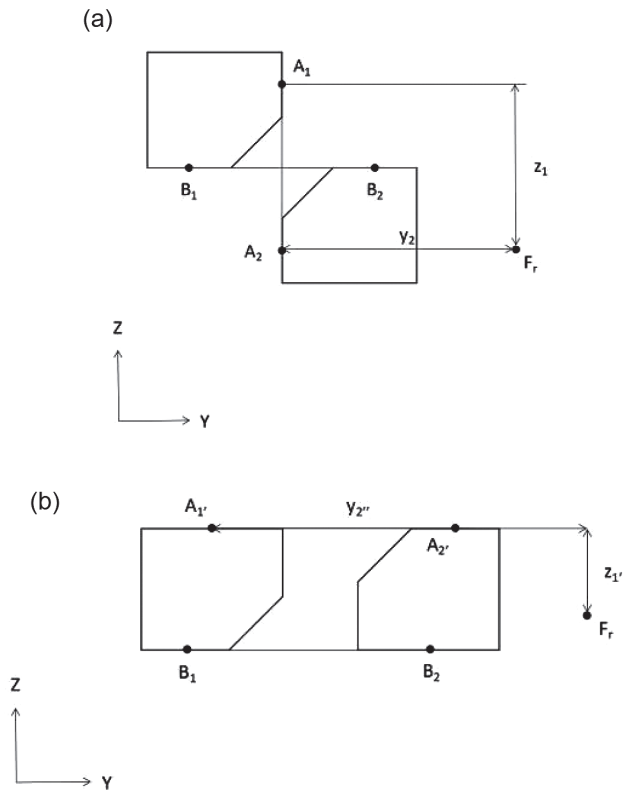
Force analysis models of ruling tool carriers in the ruling state: (a) ruling tool carrier with a cross-spring mechanism and (b) ruling tool carrier with a parallel-spring mechanism.
